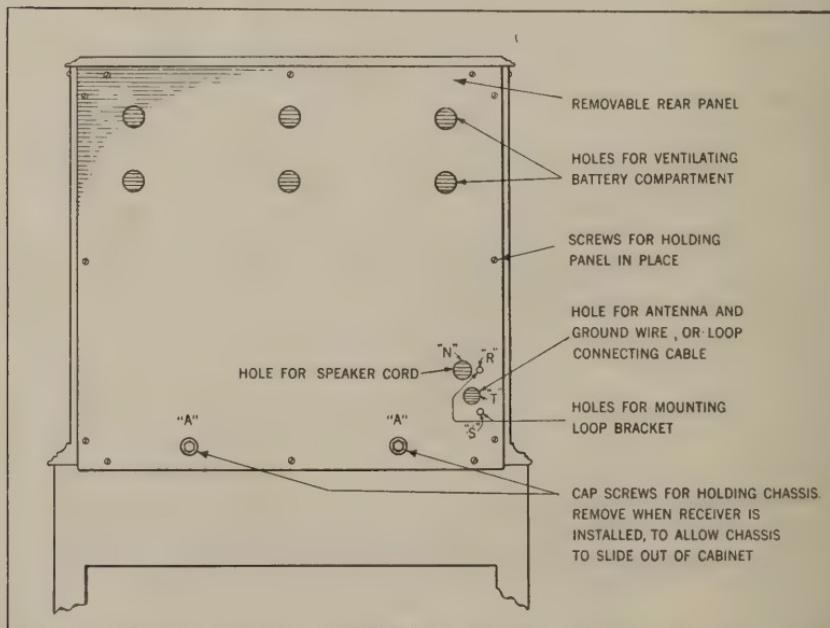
Rear of No. 602-B Cabinet, showing Chassis Holding Cap Screws and Openings for external Wiring and for Ventilation
